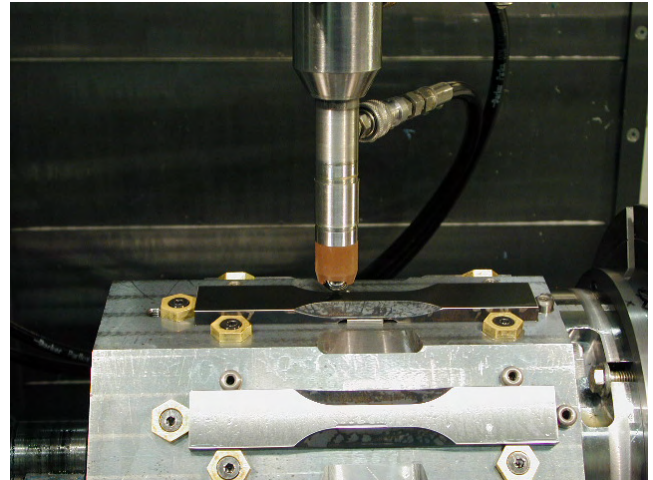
A set of 8 thick section specimens being LPB processed in a 4-axis CNC milling machine.
